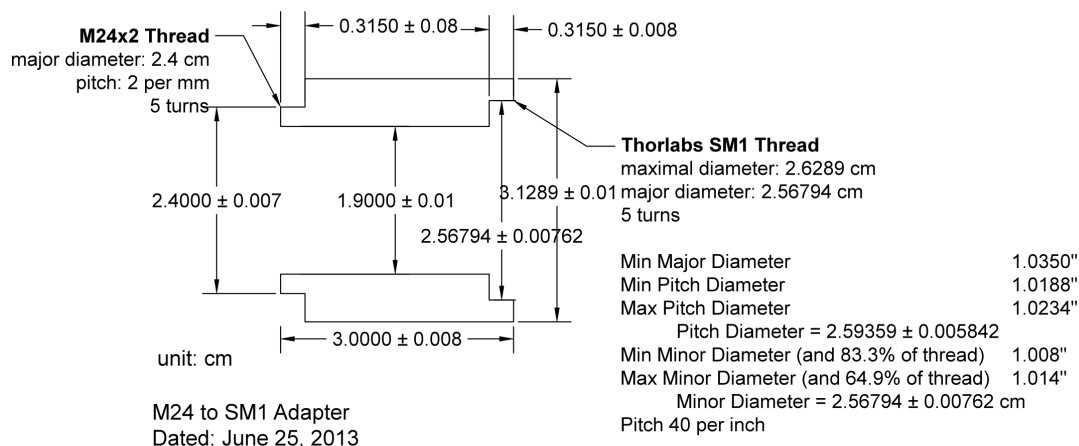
M24 Thread to Thorlab SM1 Thread Adapter
